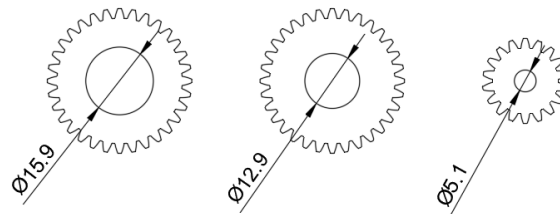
Technical drawing of gears connecting motors with knobs of the translation stage. From left to right: gear fitting to micrometer knob of bottom-most translation stage, gear fitting to knob of top-most translation stage, gear fitting to motor shaft. All gears have a 16:9 gear ratio. All dimensions are given in millimeters.
